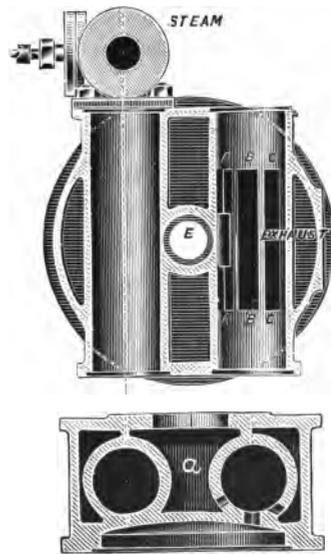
VALVE CHEST OF "UNIVERSAL" ENGINE.
